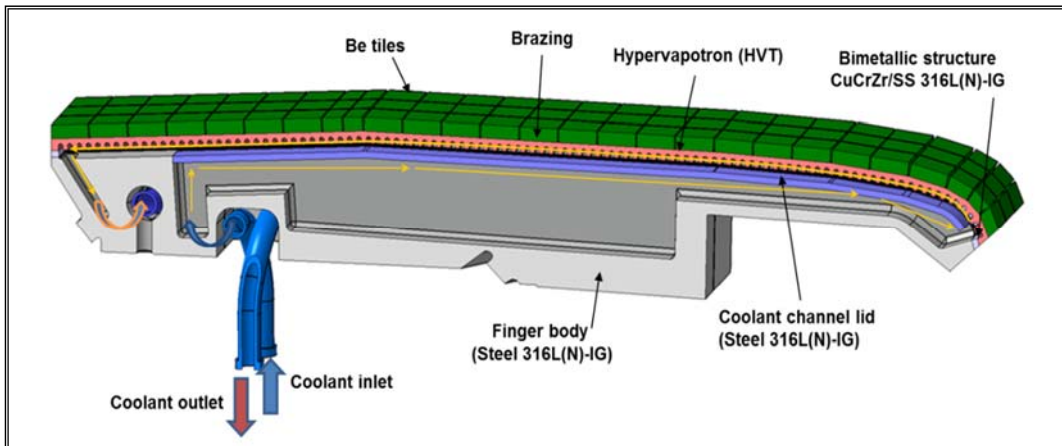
Detail of the EHF blanket module FW cooling circuit.
